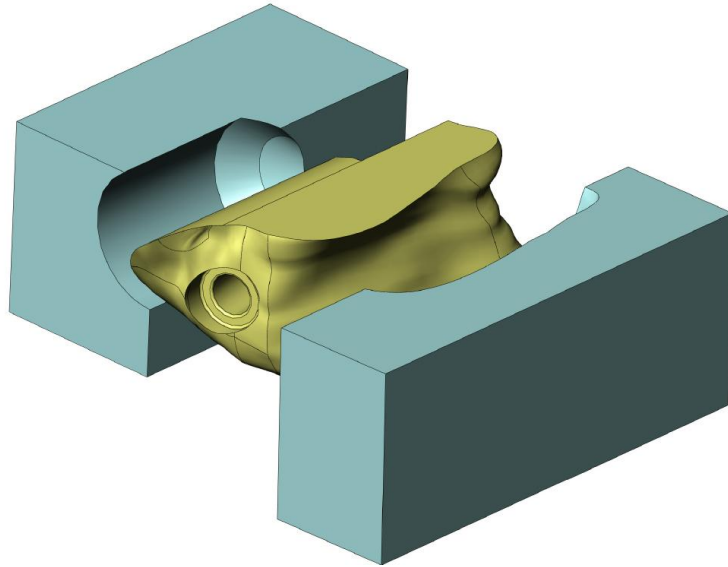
An exploded view of the final clamping of the implant, showing the implant in the center and the clamps on the sides.
